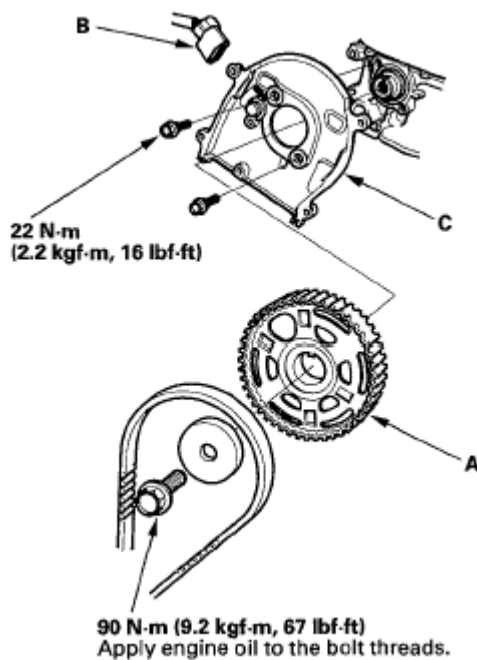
Identifying Front Camshaft Pulley, CMP Sensor Connector And CMP Sensor With Torque Specifications
